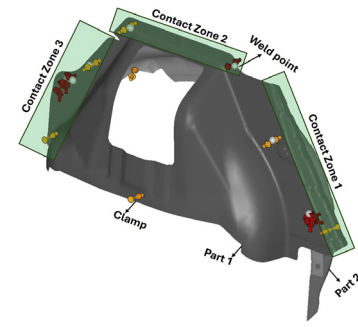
The reference assembly held in the inspection fixture and welded.
